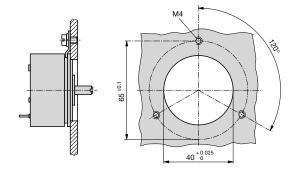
Drilling plan for fixing with 3 spring clamps.
